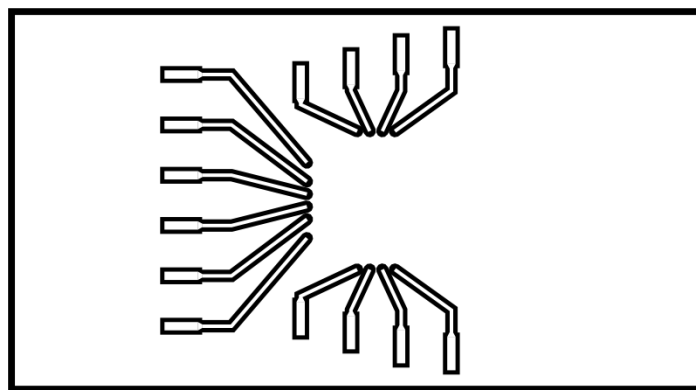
PCB design made in Inkscape. Areas which are black will be “printed” by the laser cutter, exposing the bare copper and allowing those areas to be etched. Areas in white will be copper in the finished PCB.
